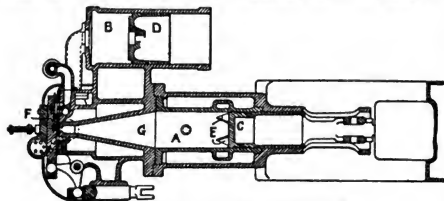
Sectional Plan of Clerk Cycle Engine, 1881.
